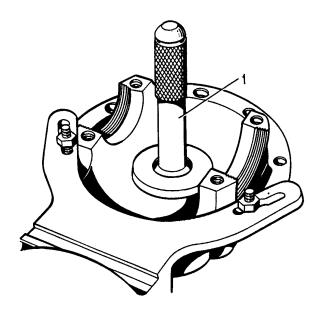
Installing Drive Pinion Rear Bearing Outer Cup:
